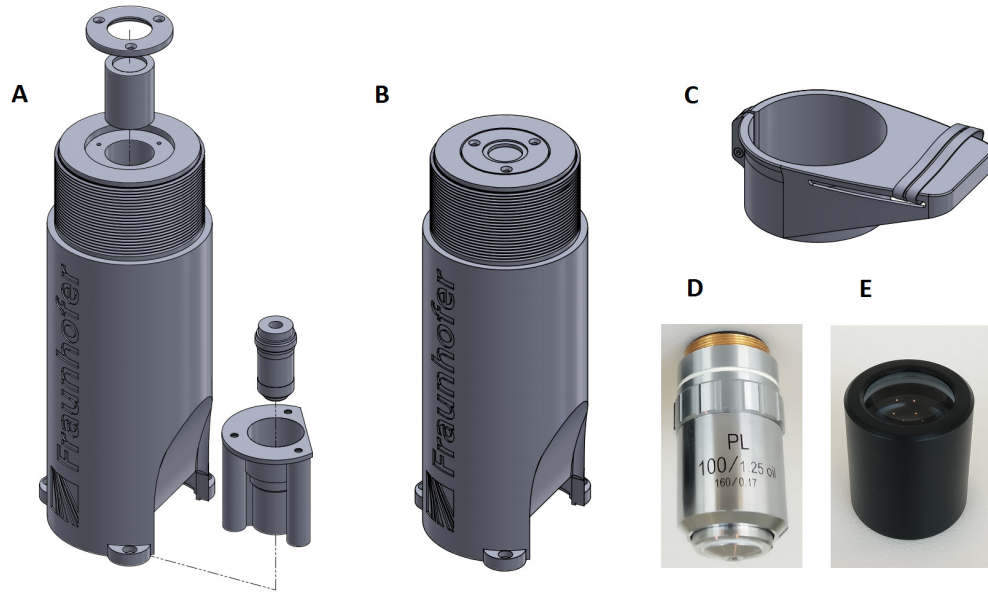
Optics module: (A) Exploded view; (B) Assembled view; (C) Smartphone holder; (D) Planachromat 100x oil-immersion objective lens; (E) Wide angle 10x eyepiece lens.
